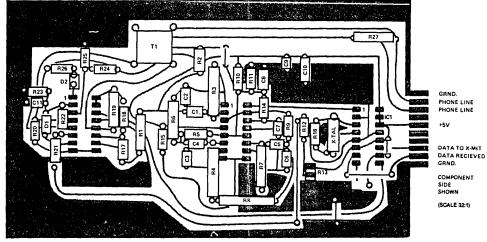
Complete FSK Modem Printed Circuit Board Layout (Circuit Shown in Figure 4)
